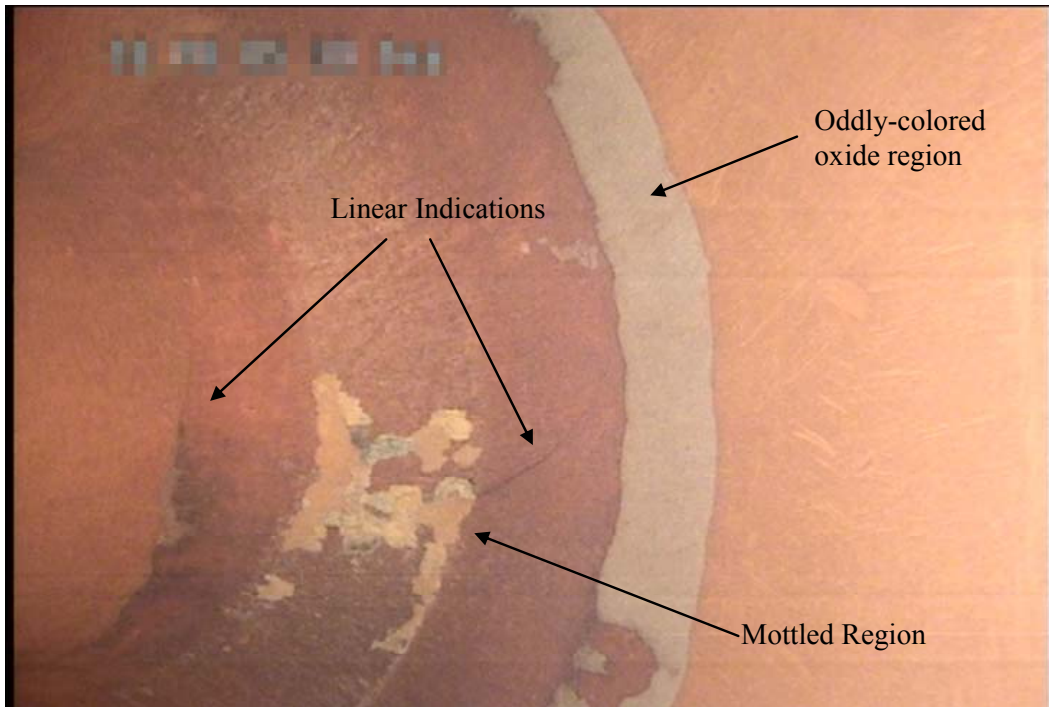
Complex Surface Geometry and Deposit Layering on BWR Component
